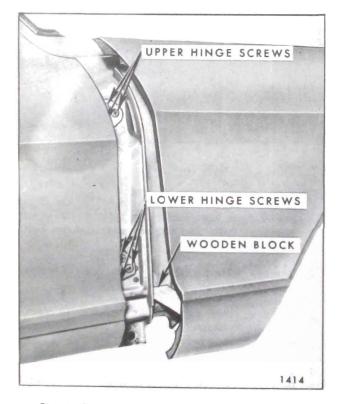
Front Door Hinge Removal - "X" Styles
